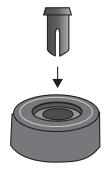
Inserting the Rivet Housing into the Bumper Foot
